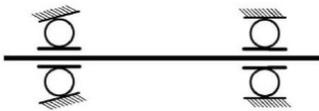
Bearing failure due to tilted outer race.
